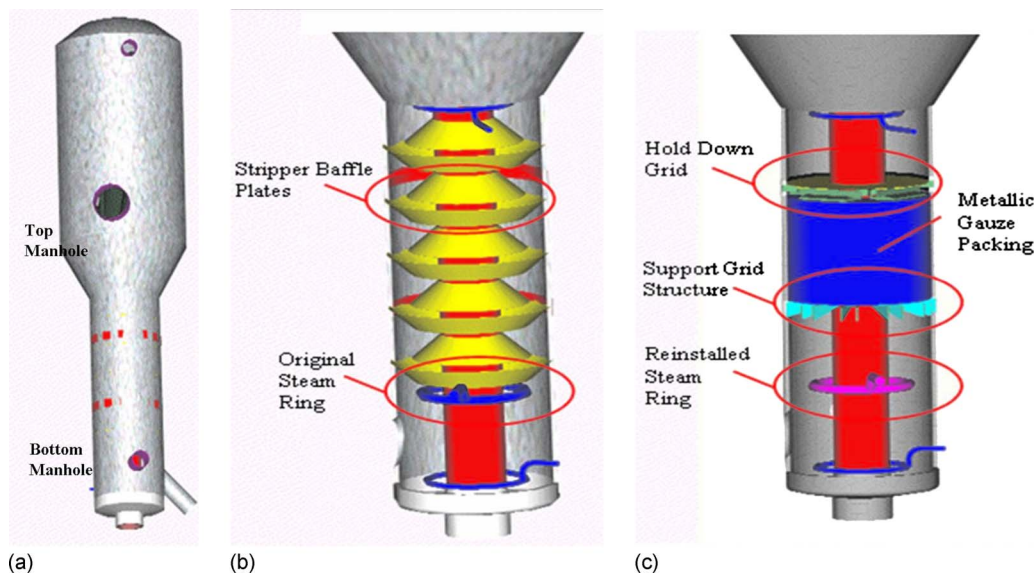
Graphical representation of works: (a) external column; (b) previous internal structure; and (c) refurbished internal structure
